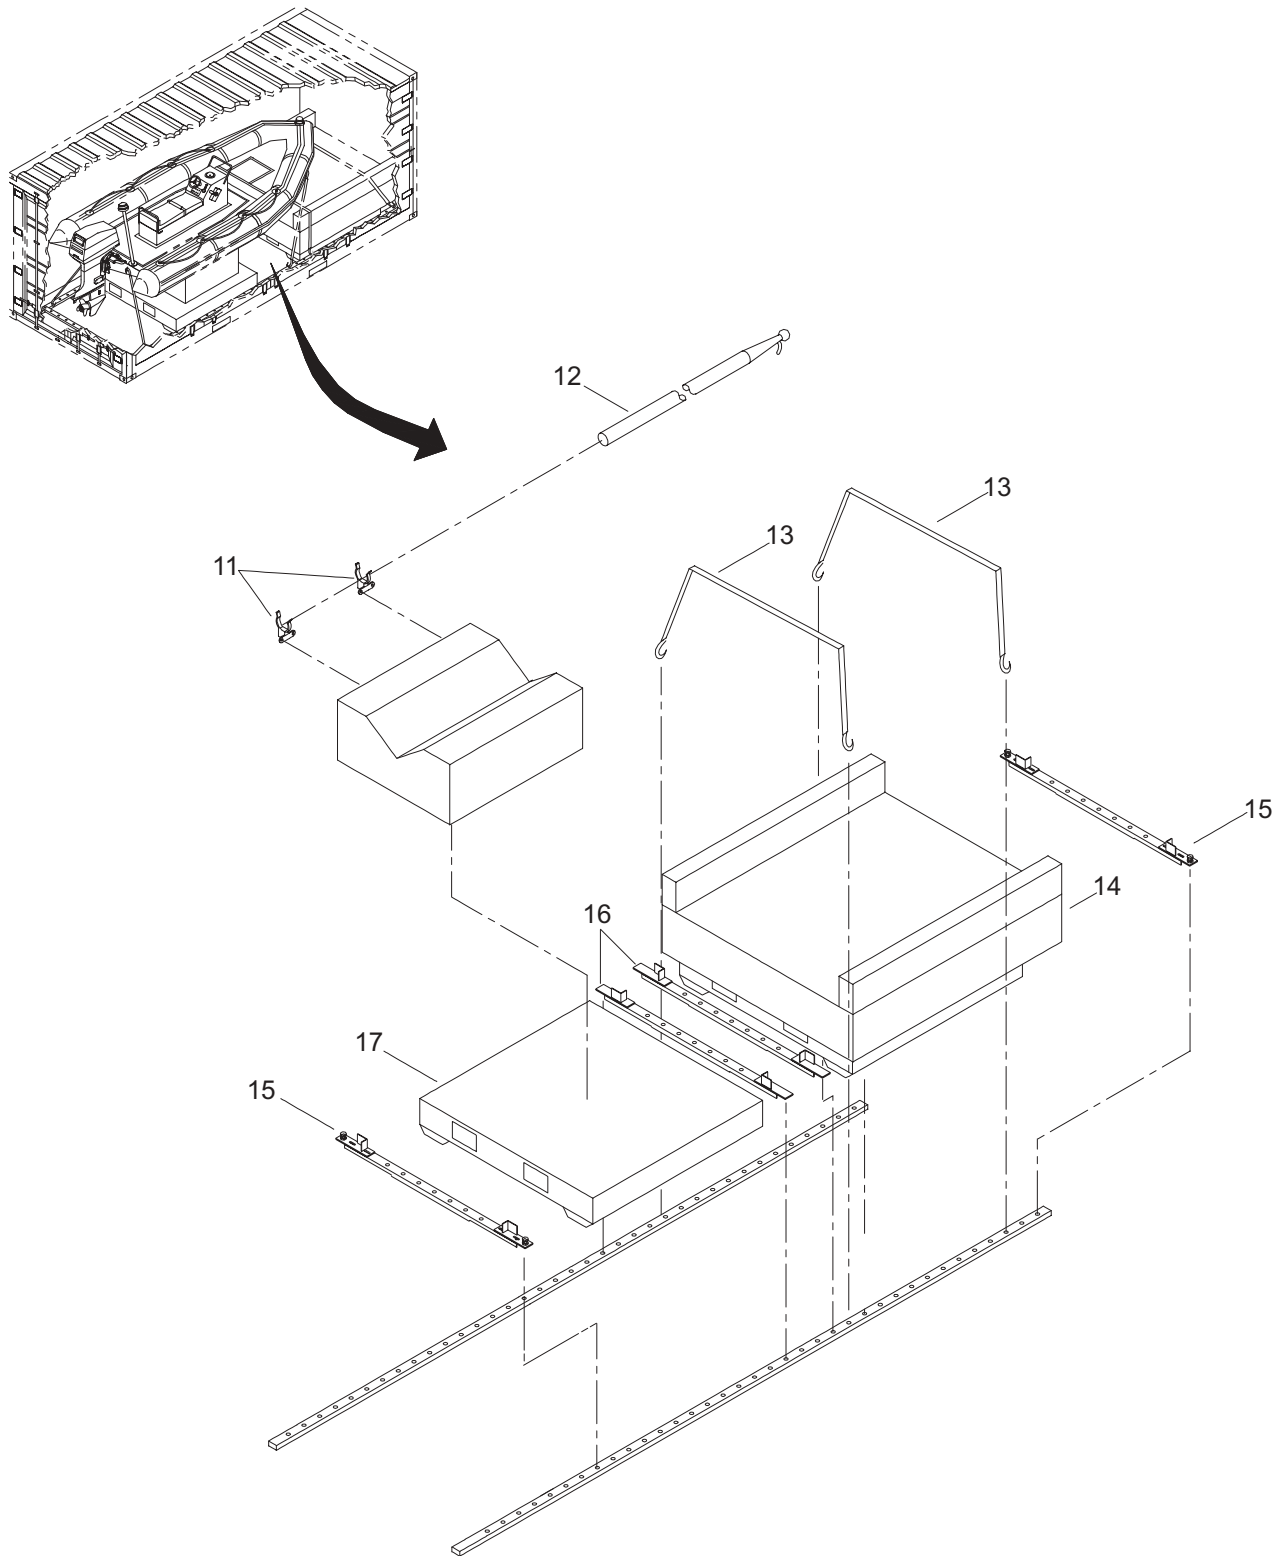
RHIB Stowage Arrangement (Sheet 3 of 3)
